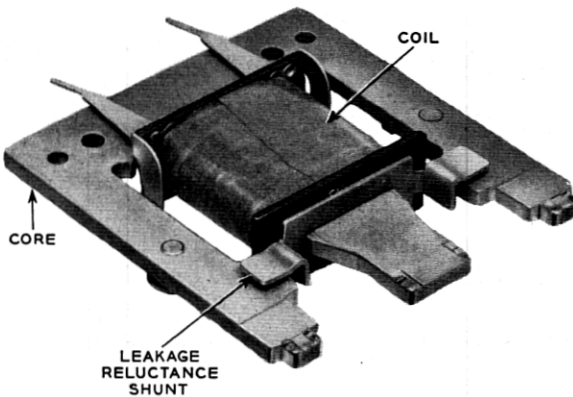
Core assembly for replacement type relays showing leakage reluctance shunt.
